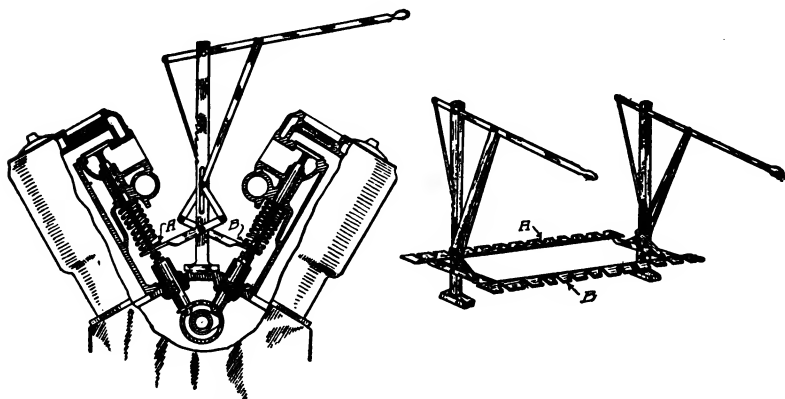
Method of Compressing All Twenty-Four Packard Valve Springs at Once
